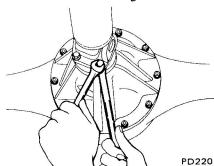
Removing four bolts securing propeller shaft to companion flange
